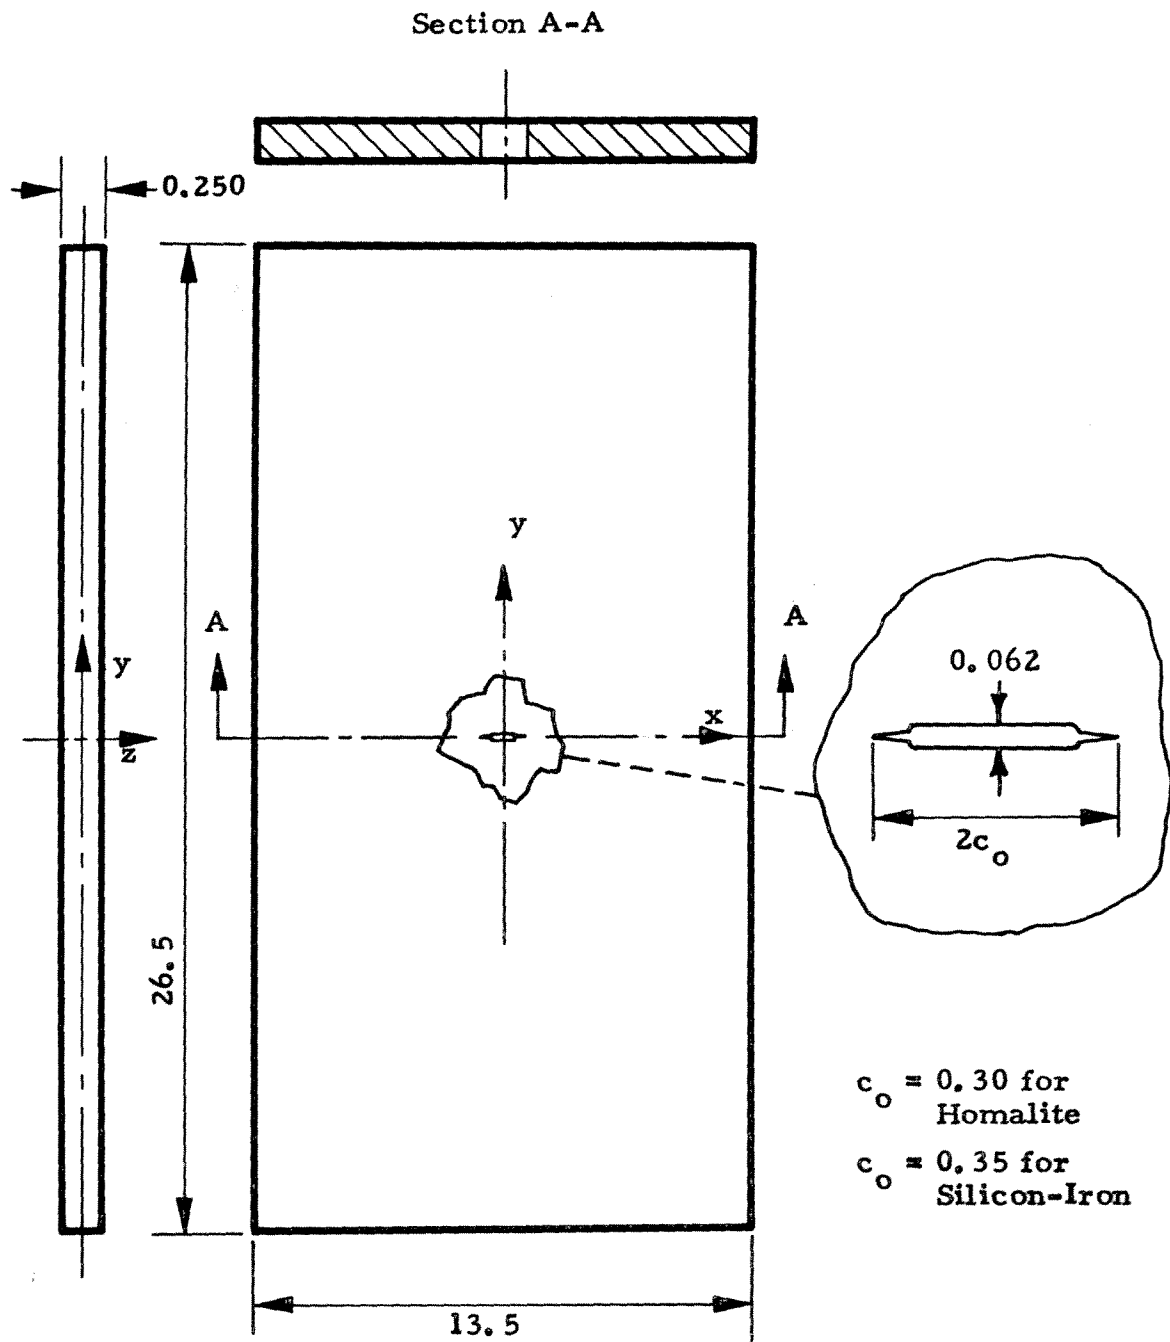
Drawing of Specimen (All Dimensions in Inches)
